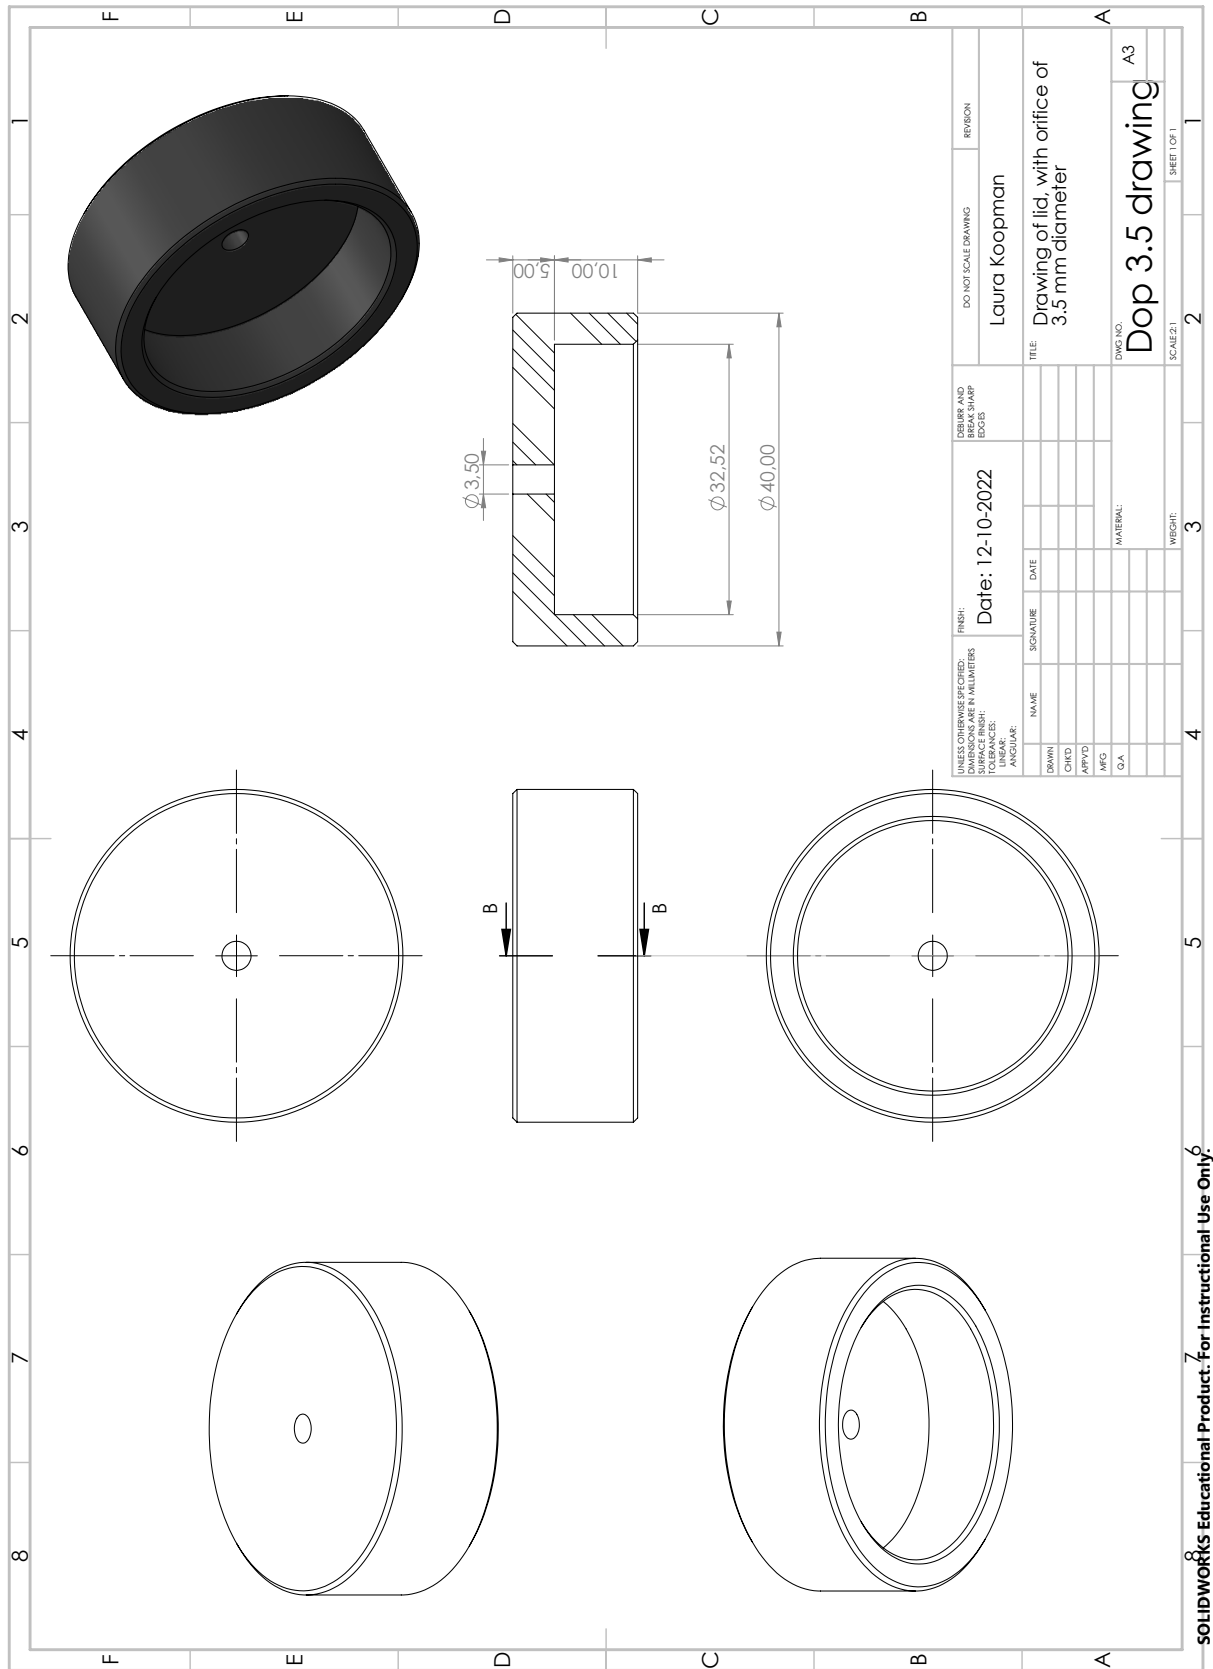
Technical drawing of the circular orifice with 10 mm^2 area.
